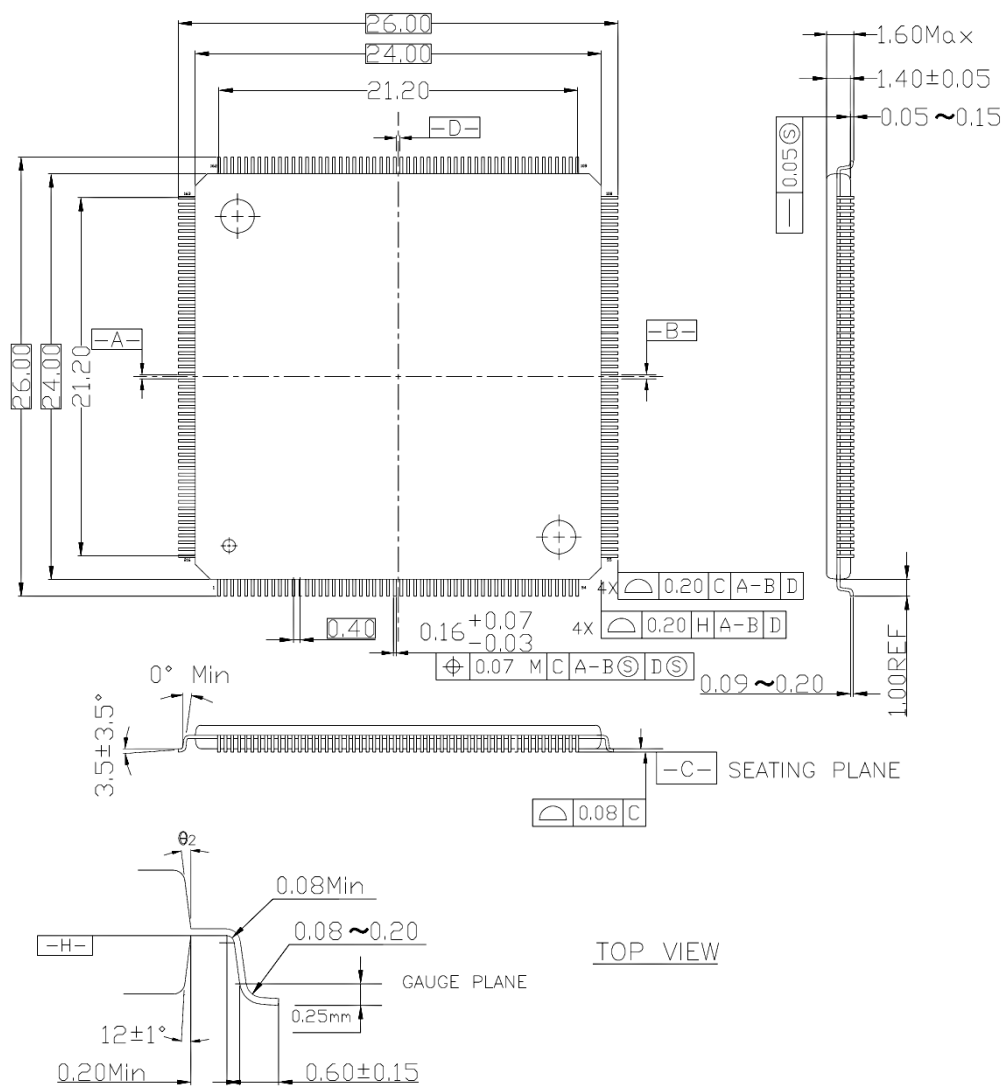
SC1701BH5-200/300 Package (top view, dimensions in mm)
